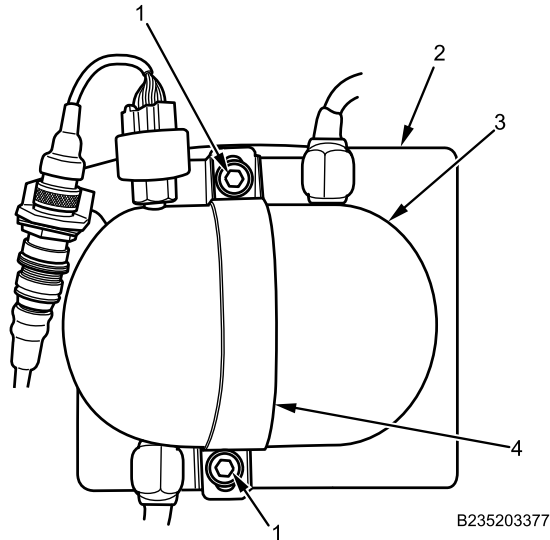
Receiver/Drier Mounting Plate and Clamp.
